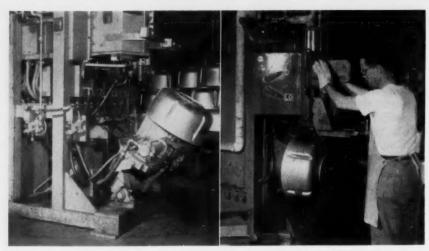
(Left) A reinforcing ring is welded to the bottom of the tub on this multi-spot welder. Fig. 20—(Right) Next, six reinforcement plates are projection welded to the tub on the press welder with index fixture shown in this illustration.
